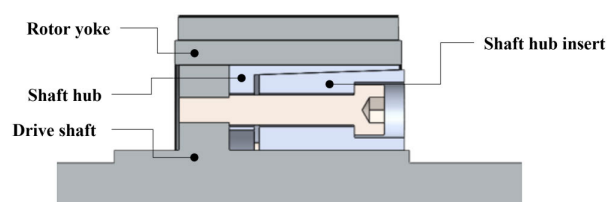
This is a cross section of an assembled rotor module. Because of an inner-tapered cylinder and tapered insert, a rotor yoke and drive shaft are secured firmly together after bolting.
